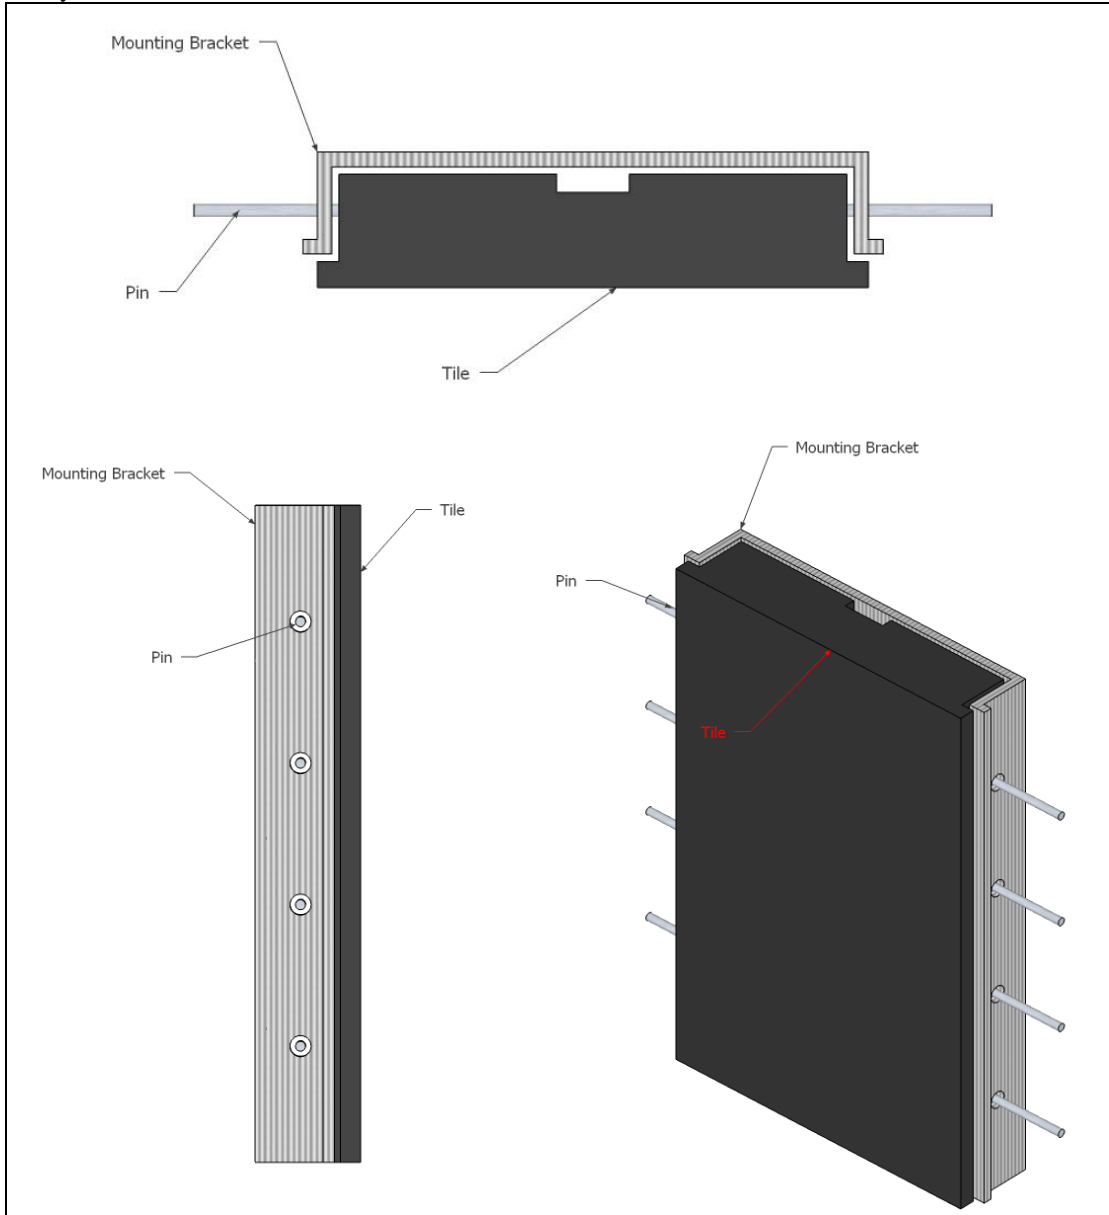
Top, side, and isometric views of the fixed CSFW tile.
